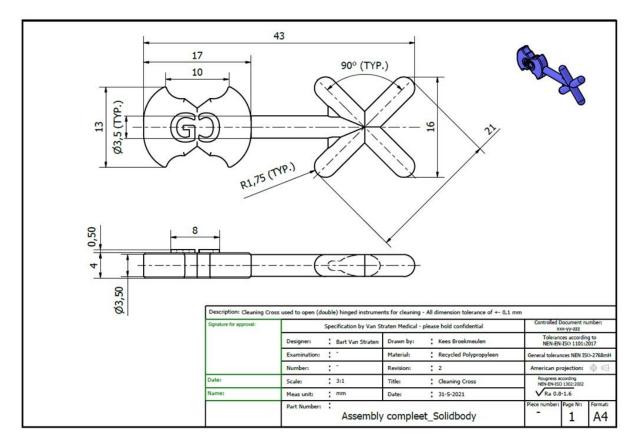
Drawing of the Go Jack instrument opener. Drawing by Bart van Straten.
